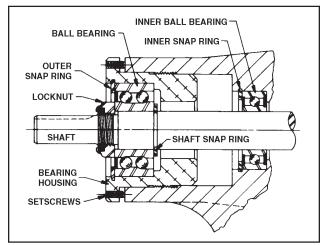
Thrust-Bearing assembly (GG, HJ, HL)
